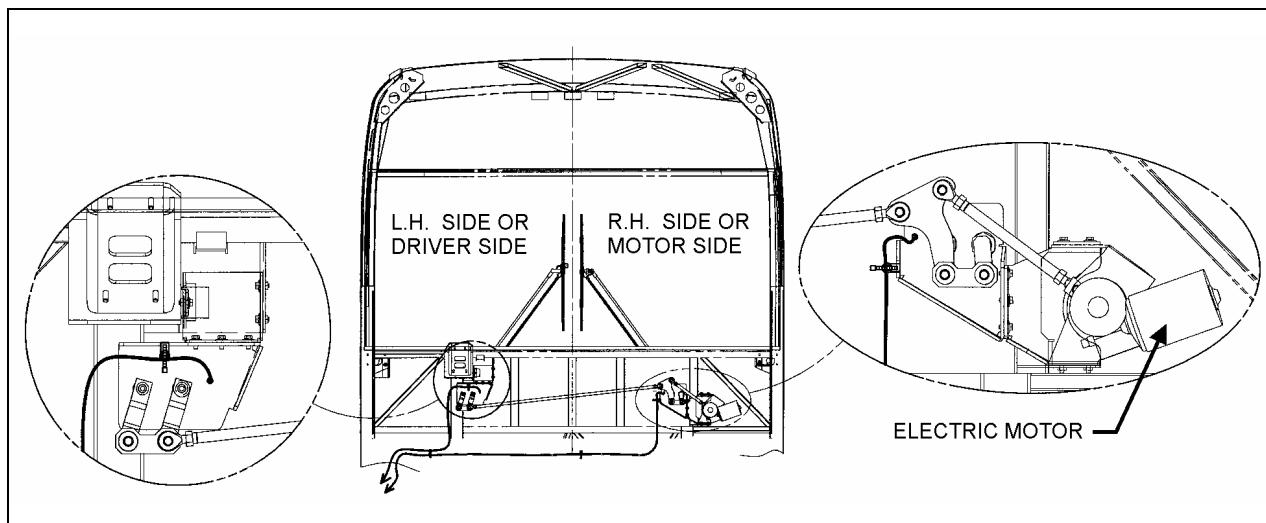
WINDSHIELD WIPER INSTALLATION
